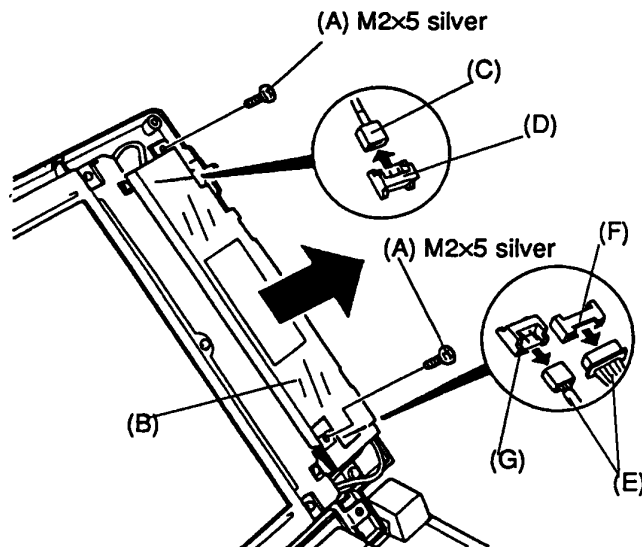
Removing the FL inverter board and disconnecting the display cables
